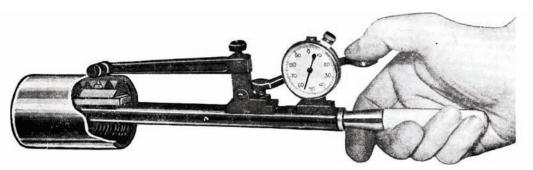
Typical Thread Height Gauge for Internal Threads in Nominal Sizes Smaller than 3
